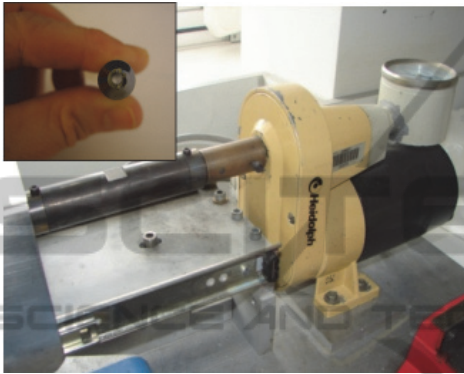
Rotational casting machine and resulting TAS tube (inset).
